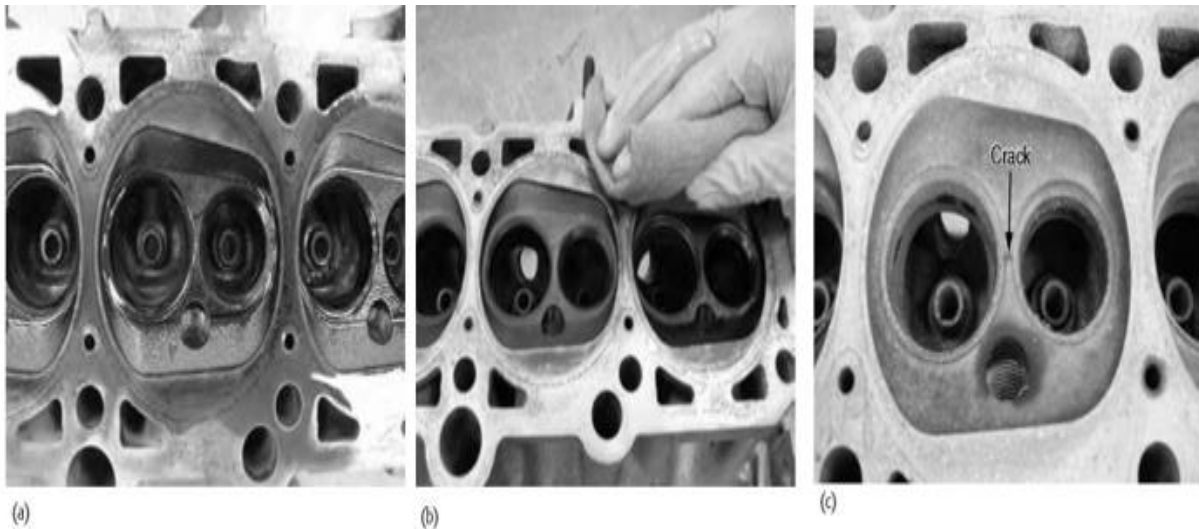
Checking for cracks with a dye penetrant. (a) Spray on penetrant. (b) After 5 minutes, clean the surface. (c) Spray on developer to highlight the crack.
